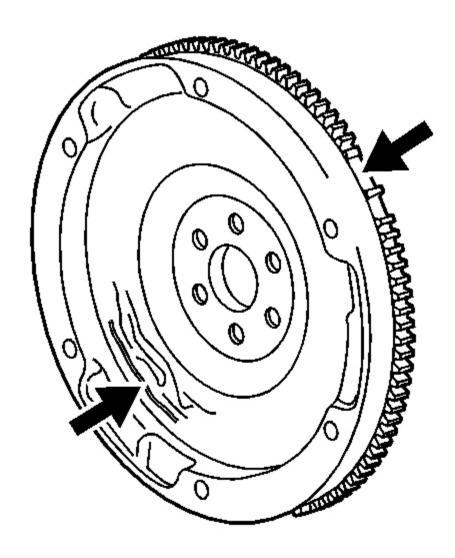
Inspecting The Flywheel Ring Gear For Damage
